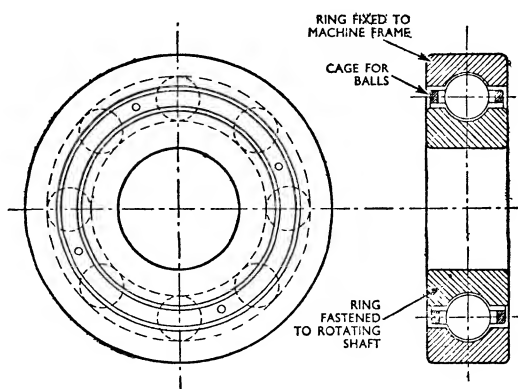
Diagram showing construction of a ball bearing for a journal, as widely used in various types of engine and machine. Note the cage for holding the balls.
